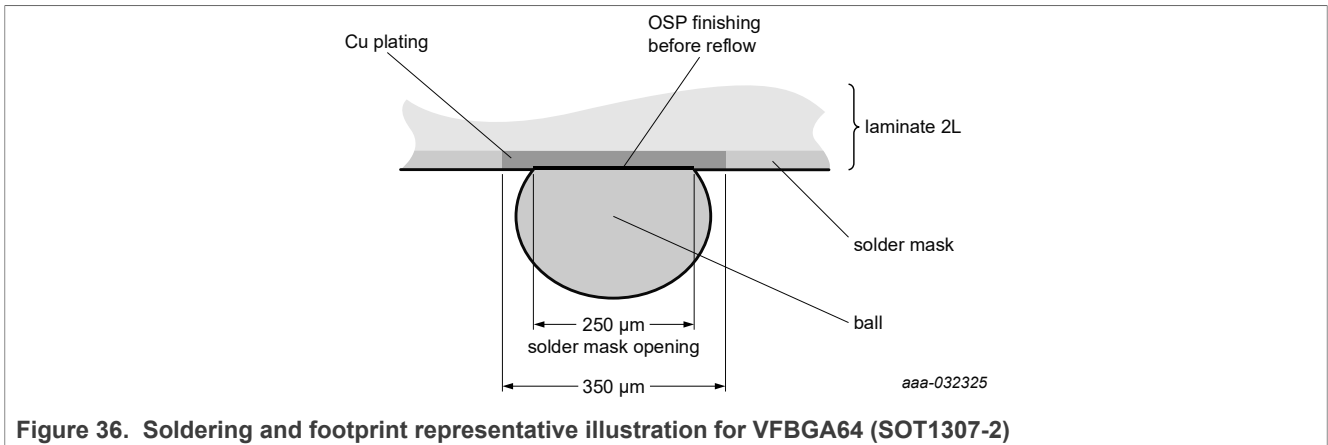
Soldering and footprint representative illustration for VFBGA64 (SOT1307-2)
